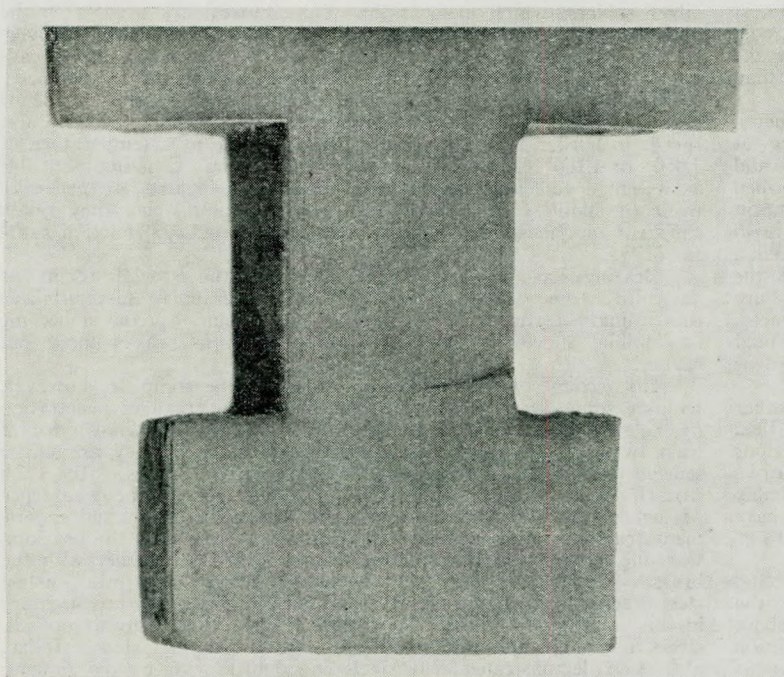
Fatigue crack in root of austenitic steel blade; the crack had its origin in the roughly machined surface at the side of the root.
